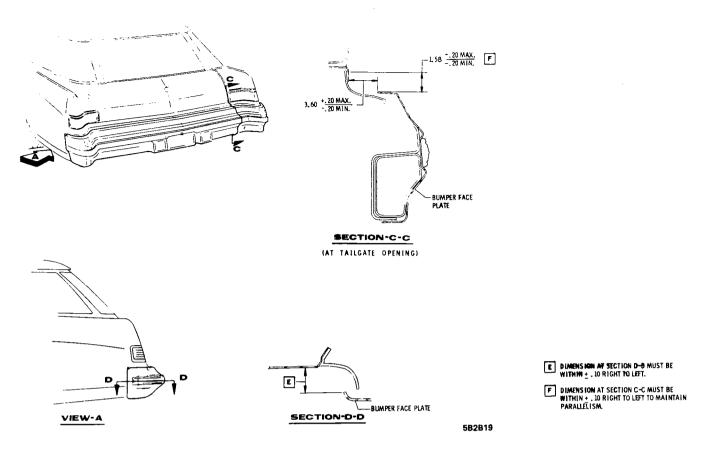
B-19 B Series Wagon Rear Bumper Clearances
